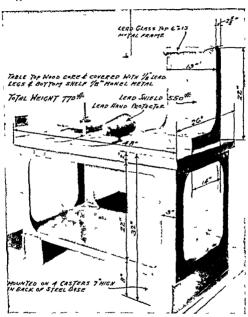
Radium assembly table. Mobile unit designed to protect the technician while handling the radium and assembling the various applicators.
